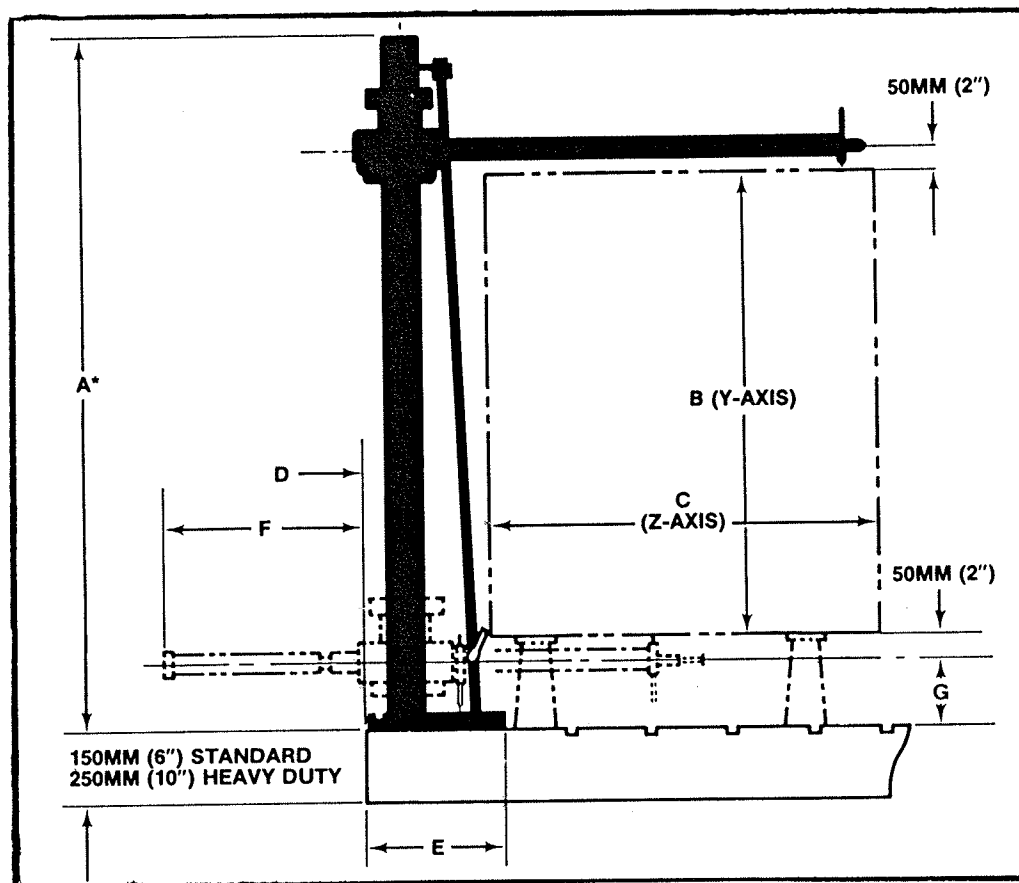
Layout machine dimensions (Courtesy of Bendix Corp.)
